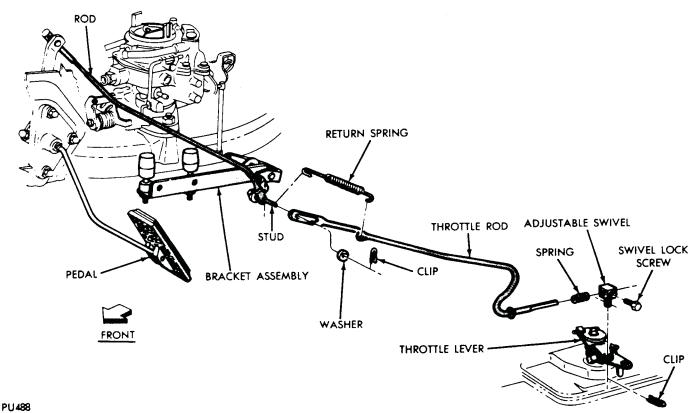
Throttle Rod Adjustment (6 Cylinder Models)
